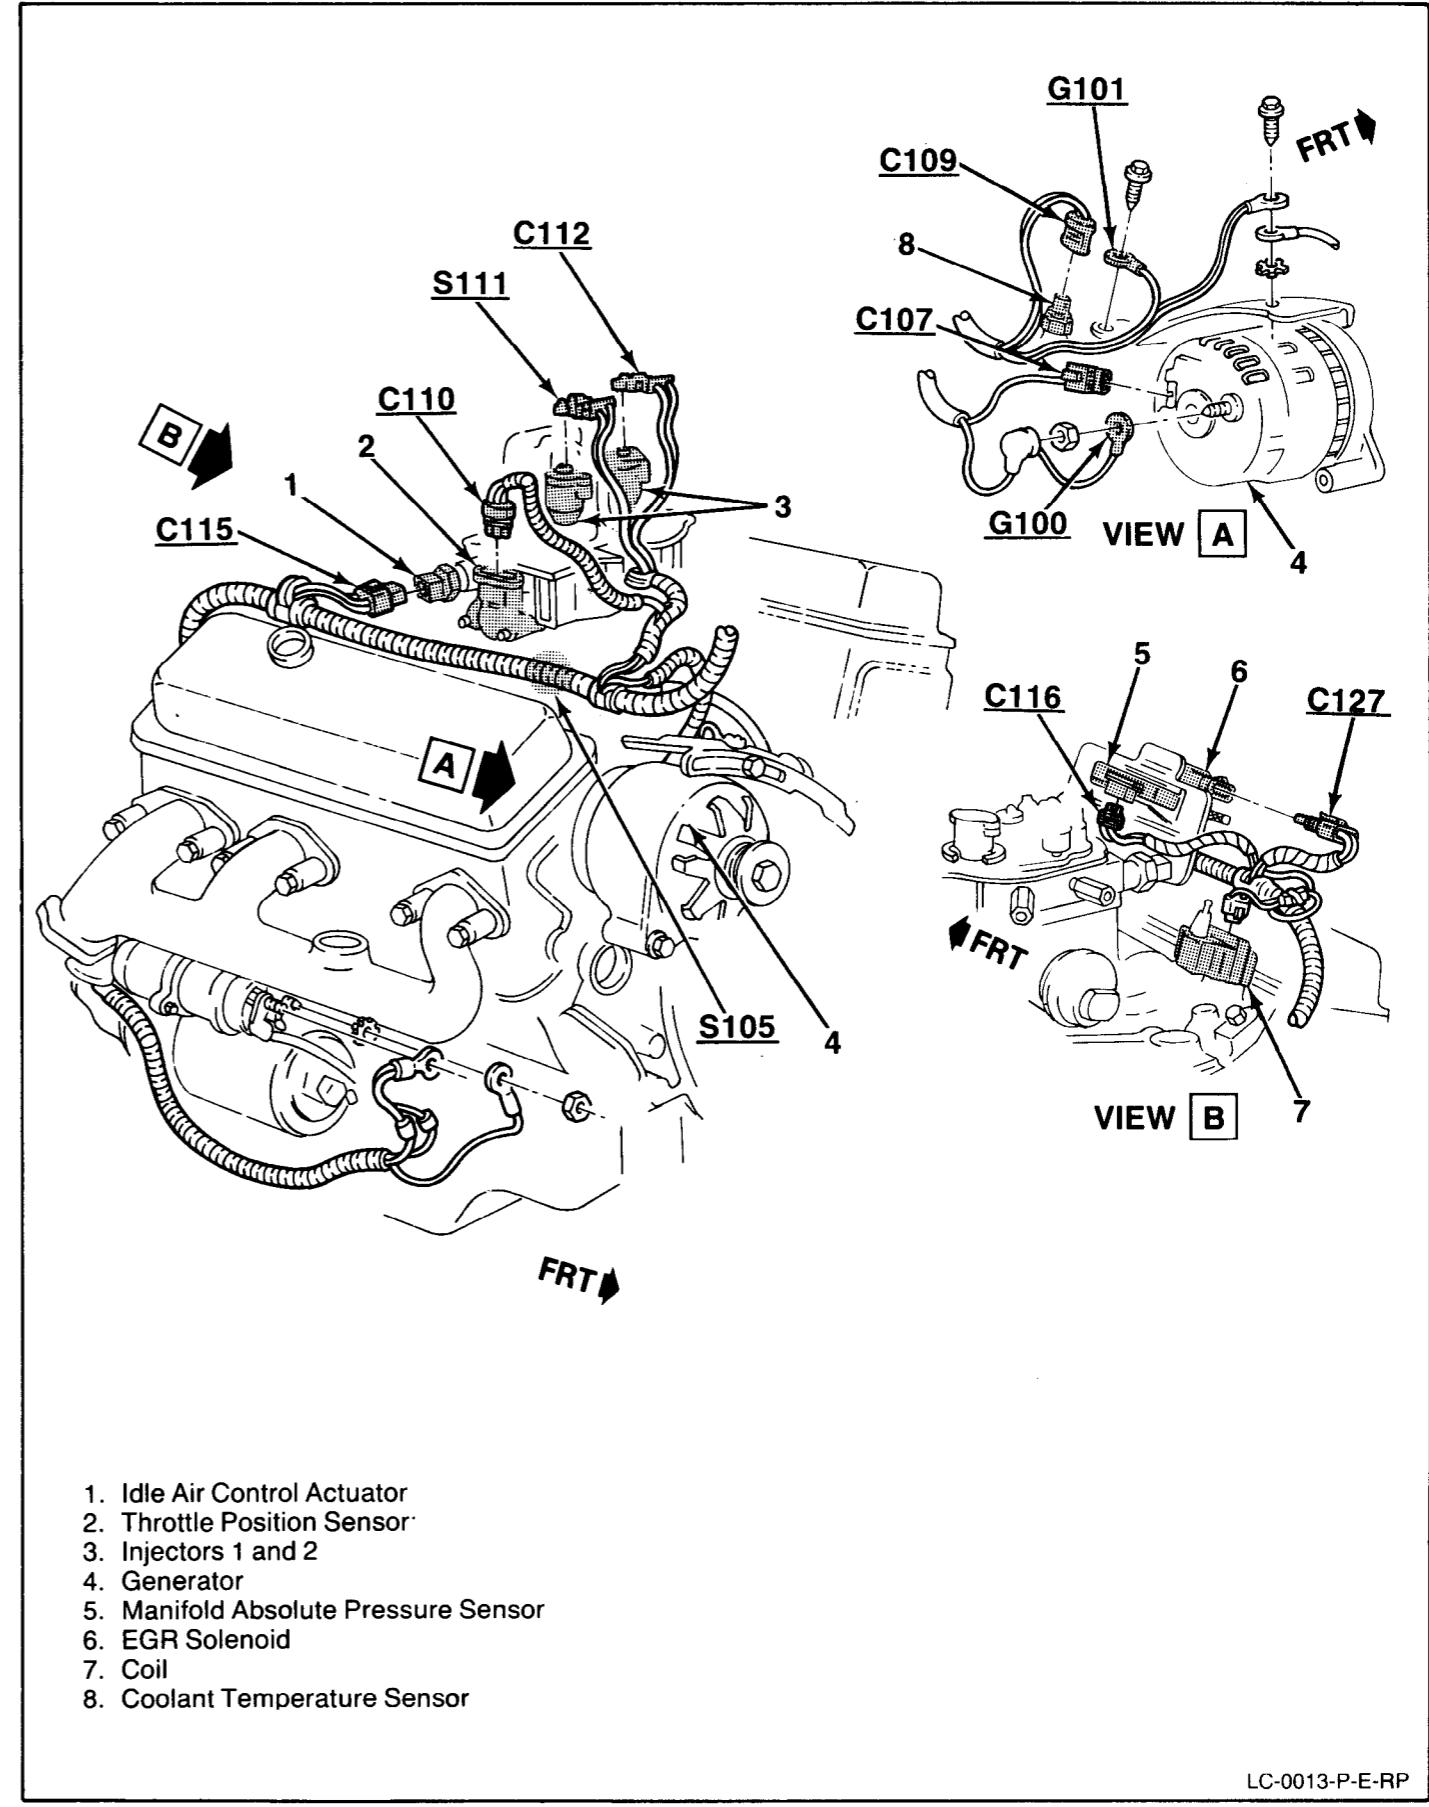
Engine Wiring Harness, RH Side (RPO LB4 w/P42)
